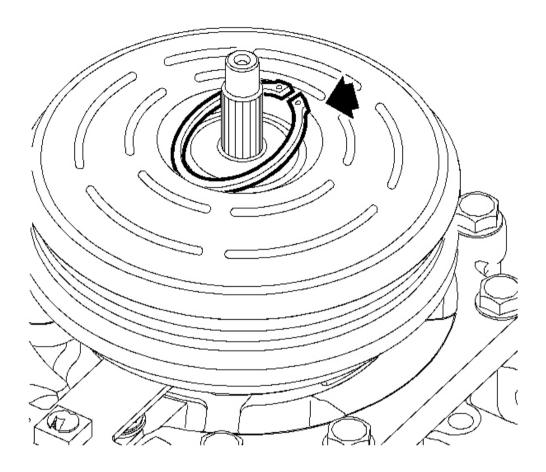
Clutch Nut, Disk & Hub Assembly Courtesy of GENERAL MOTORS CORP.
